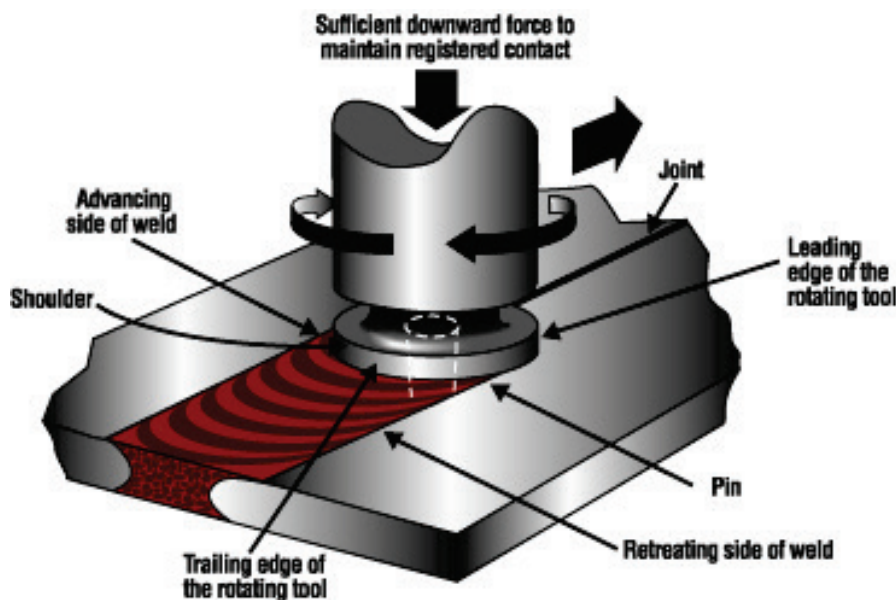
Schematic representation of Friction Stir Welding.
